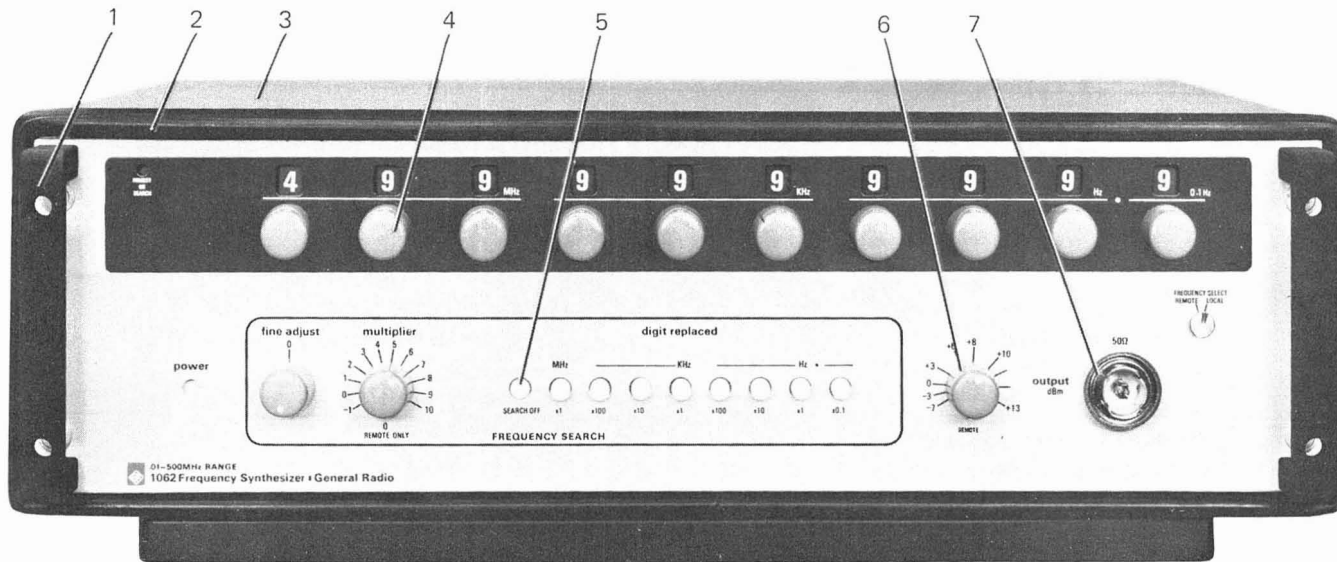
Mechanical parts, front panel, Option 1 versions only.
